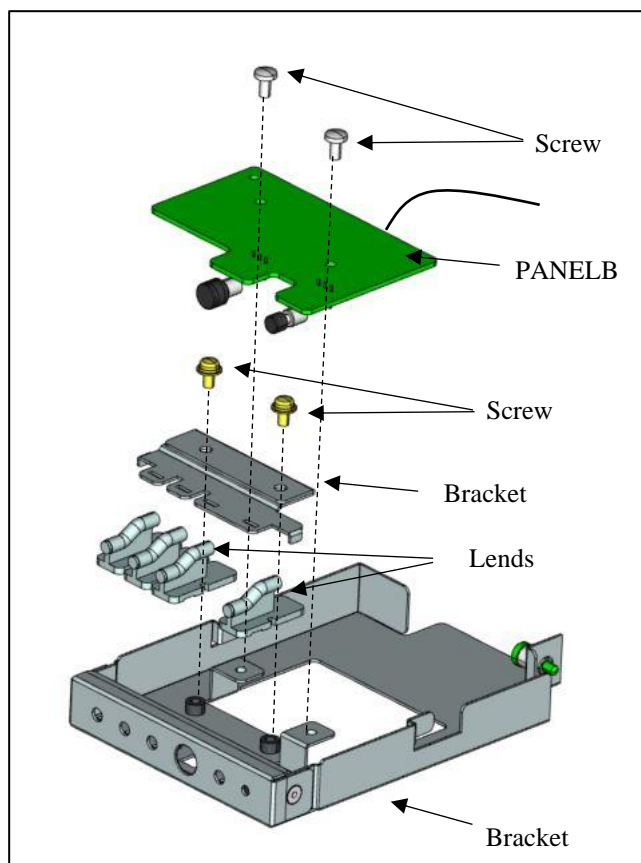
Removing the PANELB, Screw, Bracket and Lends
